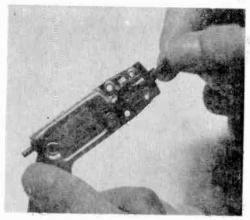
Old turnover type crystal cartridge mounts and pivots on front shaft; it's removed by taking turnover knob off.
